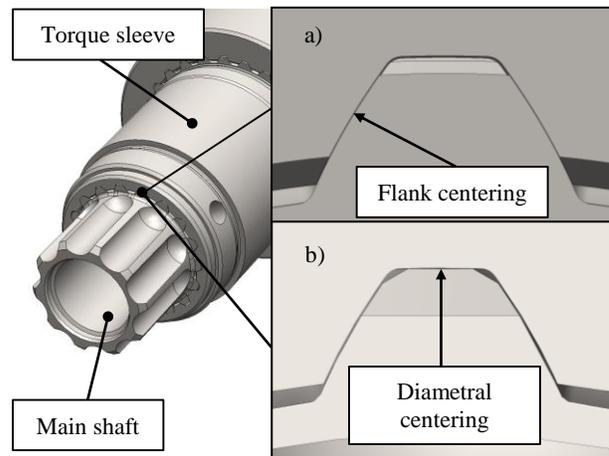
Torque sleeve and main shaft spline joint: (a) flank positioning- insufficient positioning accuracy; (b) outer diameter positioning – adequate centering of the sleeve
